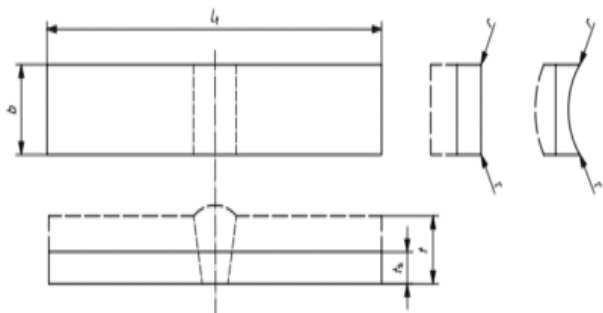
Transverse root bend test specimen for a butt weld [10]
